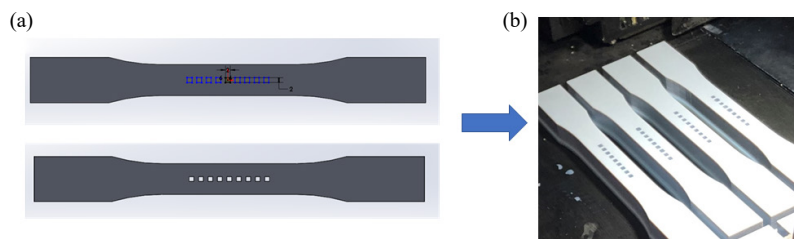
(a) CAD design of CNFs embedded component test coupon; (b) CNFs embedded test coupons
